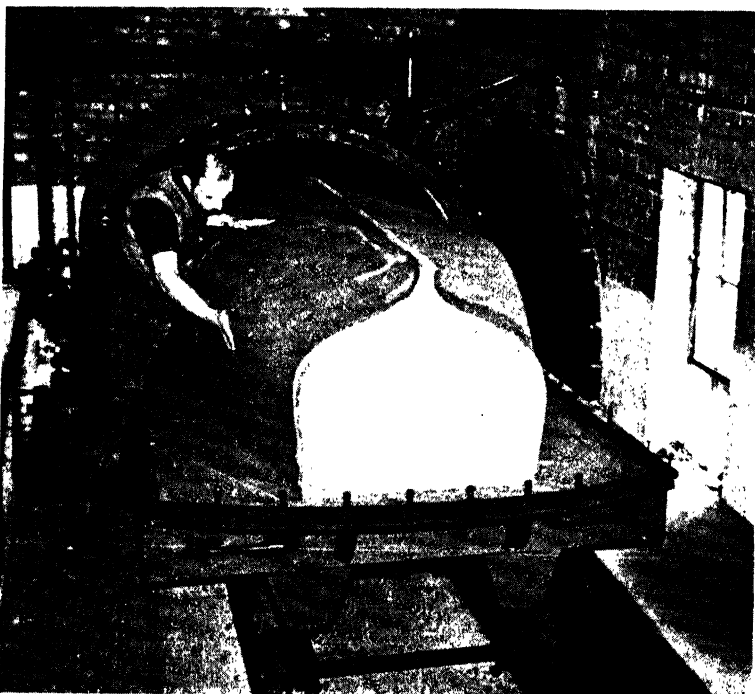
Boat shell assembled on mould covered with rubber being placed in autoclave<sup>14</sup>
